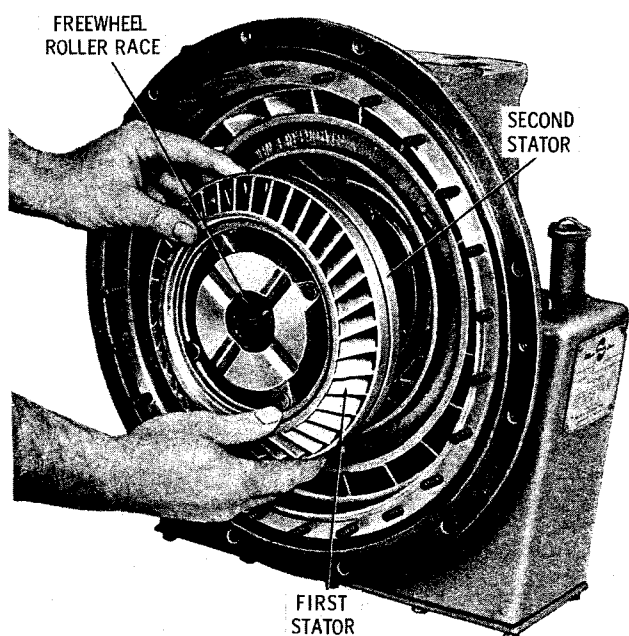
Installing first-and-second stator assembly (TC 300)
